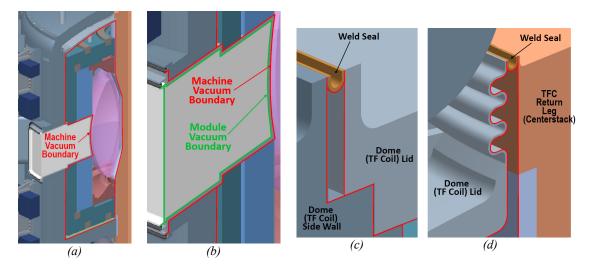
Vacuum boundary and seal welds concepts for (a) FNSF chamber (red line), (b) mid-plane test module (green line), (c) for the top dome / TF coil (red line), and (d) top of the TFC center post (red line).
